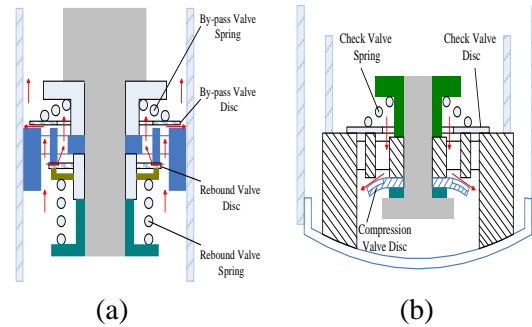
Fluid paths through the piston valve and base valve during the compression stroke
